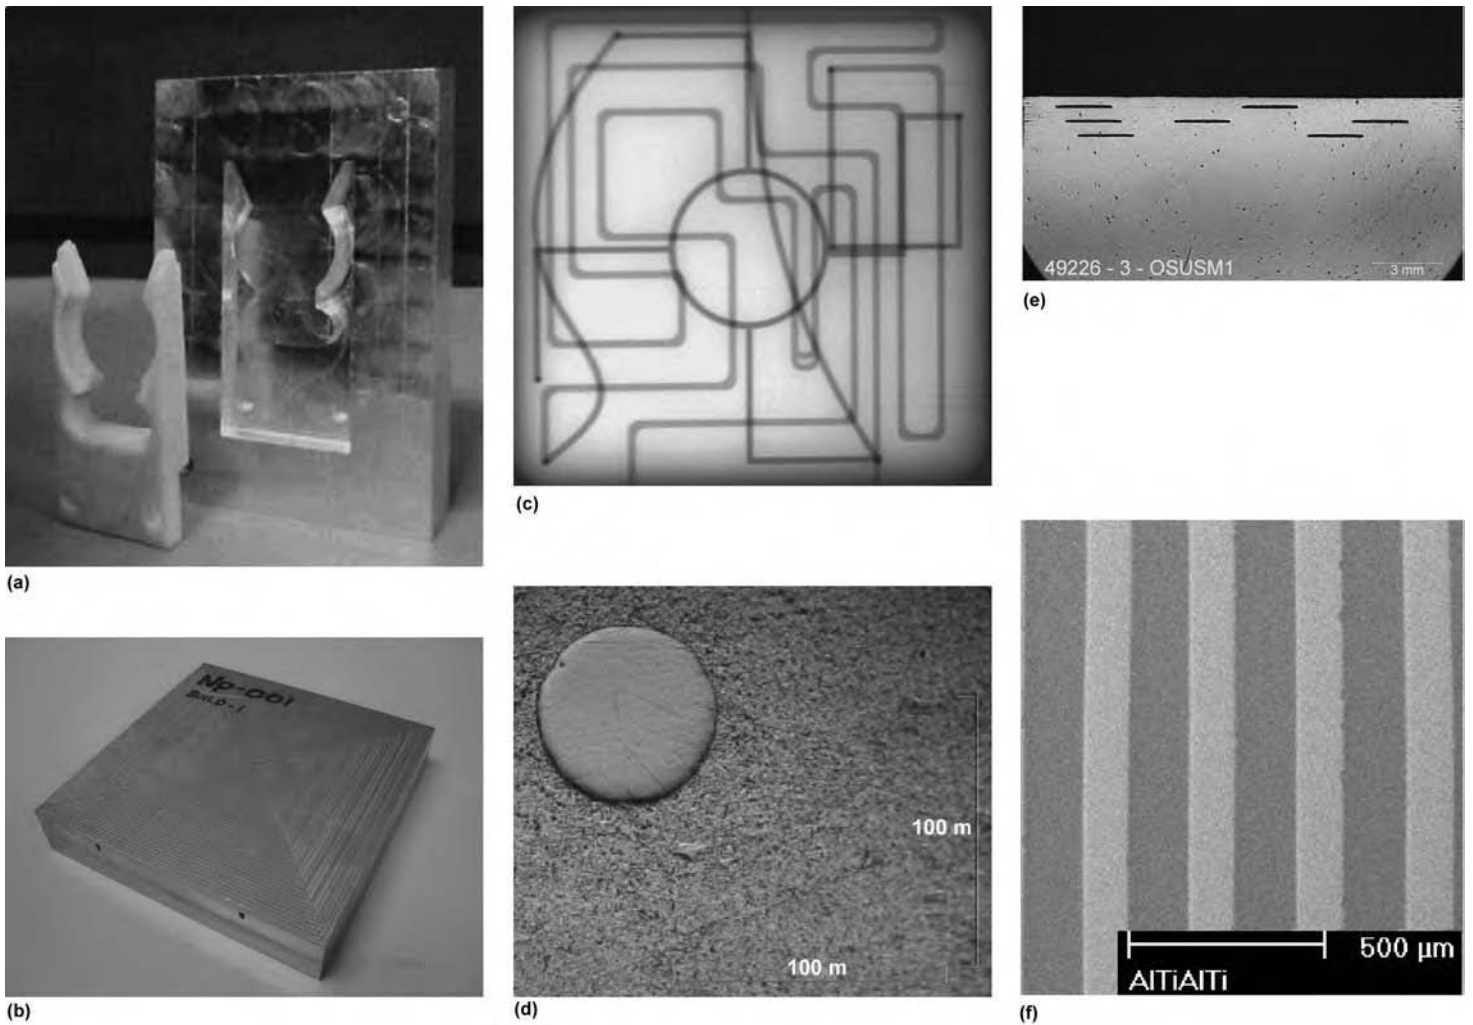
Applications of ultrasonic additive manufacturing. (a) Injection molding die and part. Courtesy of Solidica Inc. (b) Plate with embedded channels. Courtesy of Edison Welding Institute. (c) X-ray of channel network in (b). Courtesy of Edison Welding Institute. (d) Embedded NiTi wire, 0.076 mm (0.003 in.) in diameter. Original magnification: 400 \times . Courtesy of The Ohio State University. (e) Embedded nickel tape, 2.5 mm wide by 0.1 mm thick (0.10 by 0.004 in.). Courtesy of The Ohio State University. (f) Titanium-aluminum composite. Courtesy of Solidica Inc.
